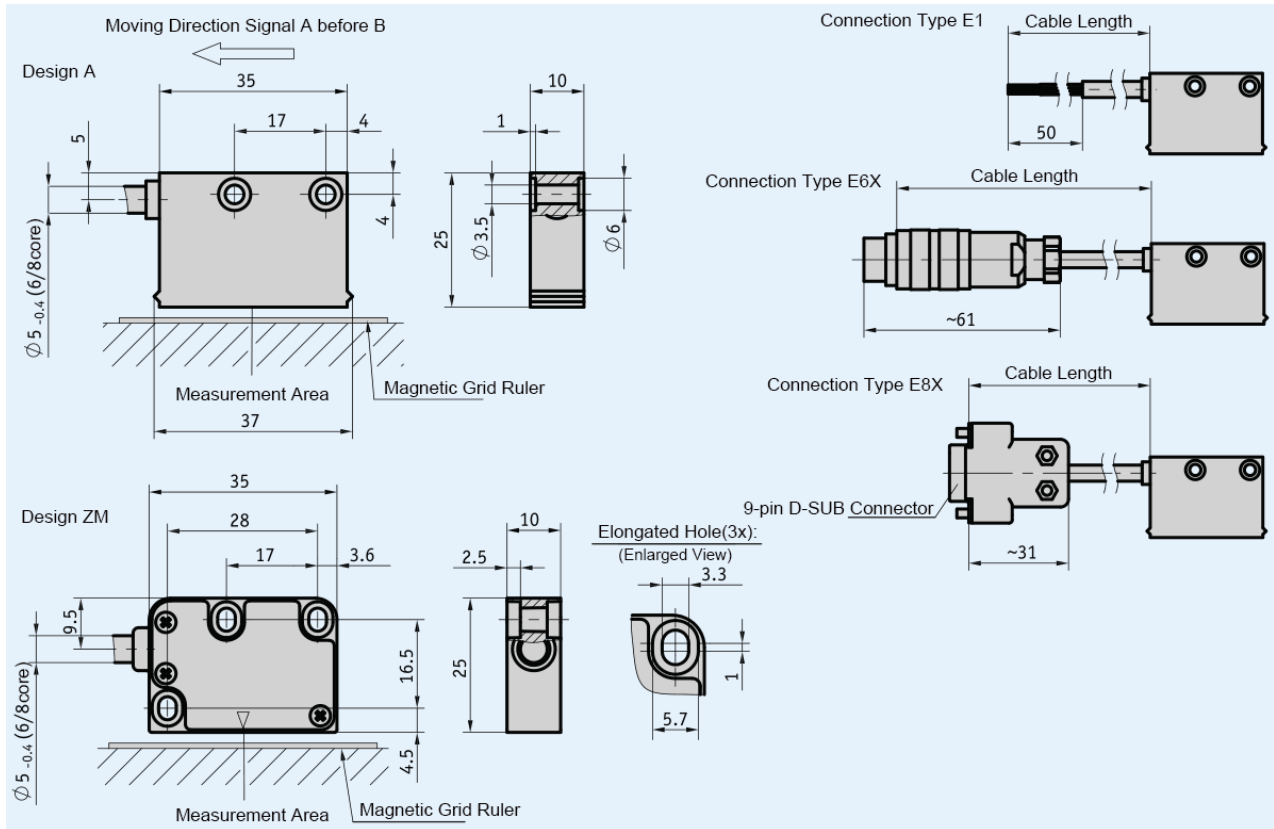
Dimensional drawing of MSK200/1 Magnetic Grid Reading Head
